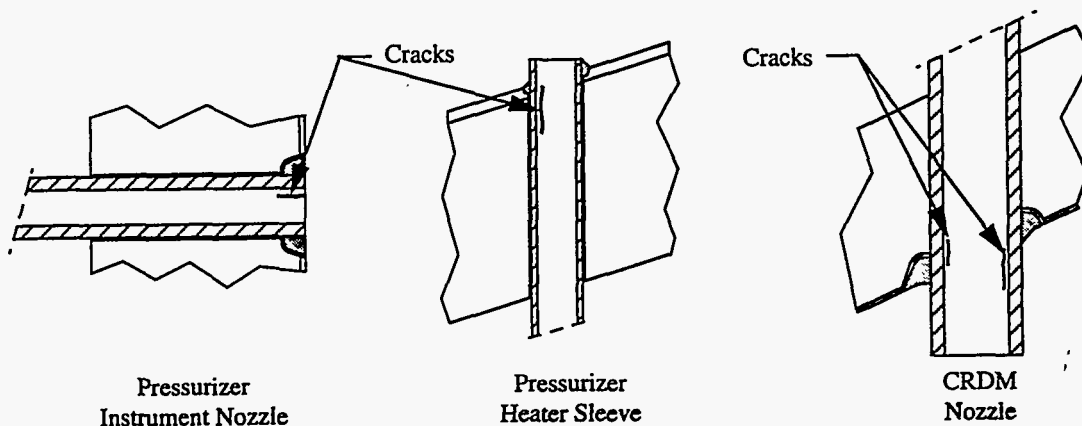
Typical Alloy 600 Penetrations and Crack Locations
